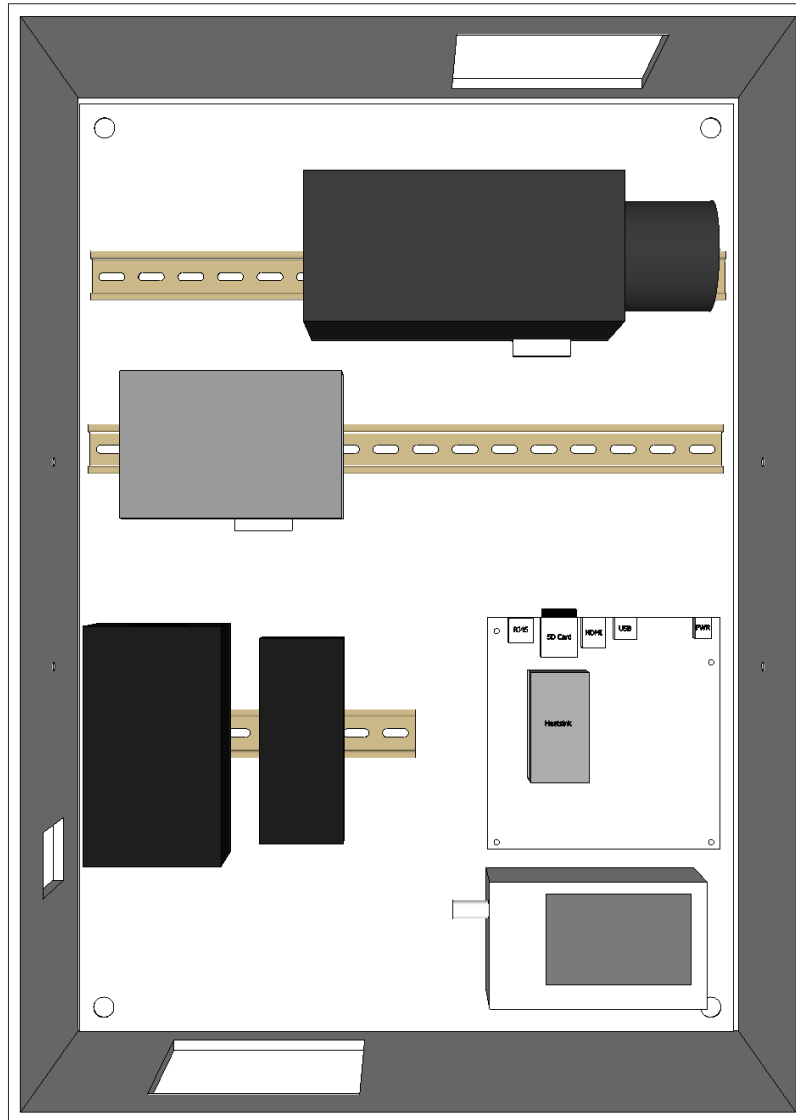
SLED/M System Enclosure and Mechanical Layout Sketch
